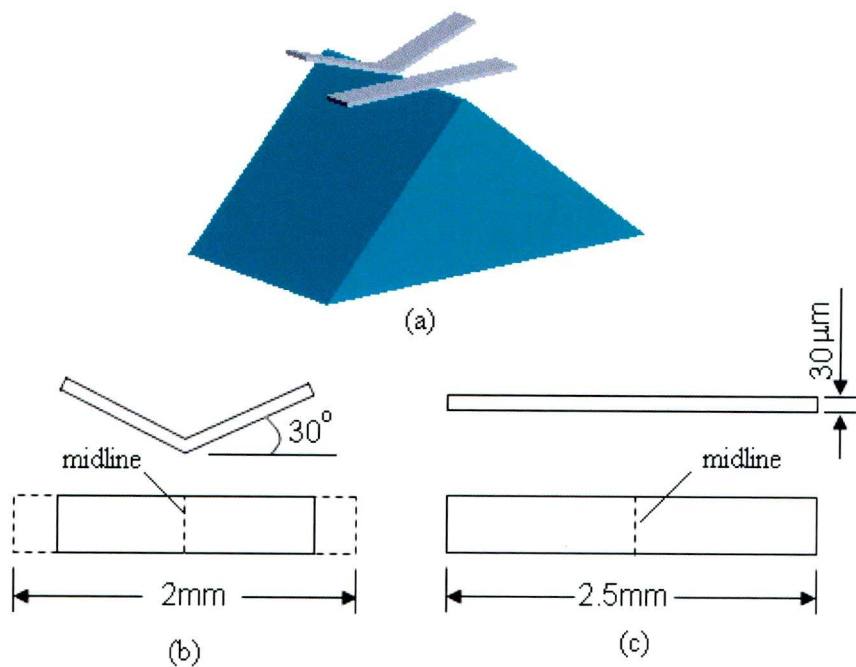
Layout of the sensor array and the dimensions of the sensors
